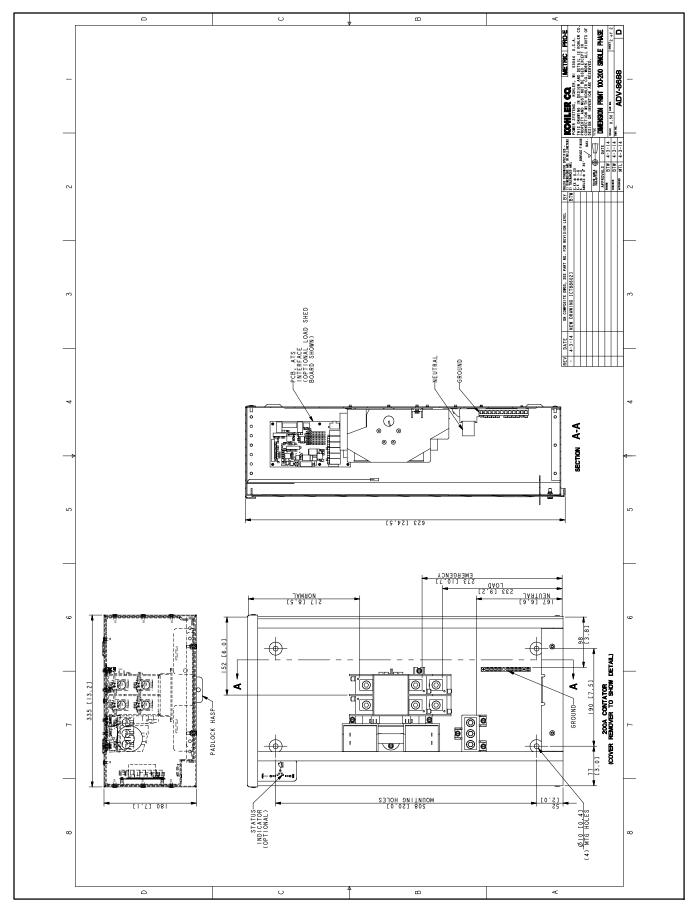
Enclosure Dimensions, 100-200 Amp Single-Phase, ADV-8688, Sheet 2 of 2
